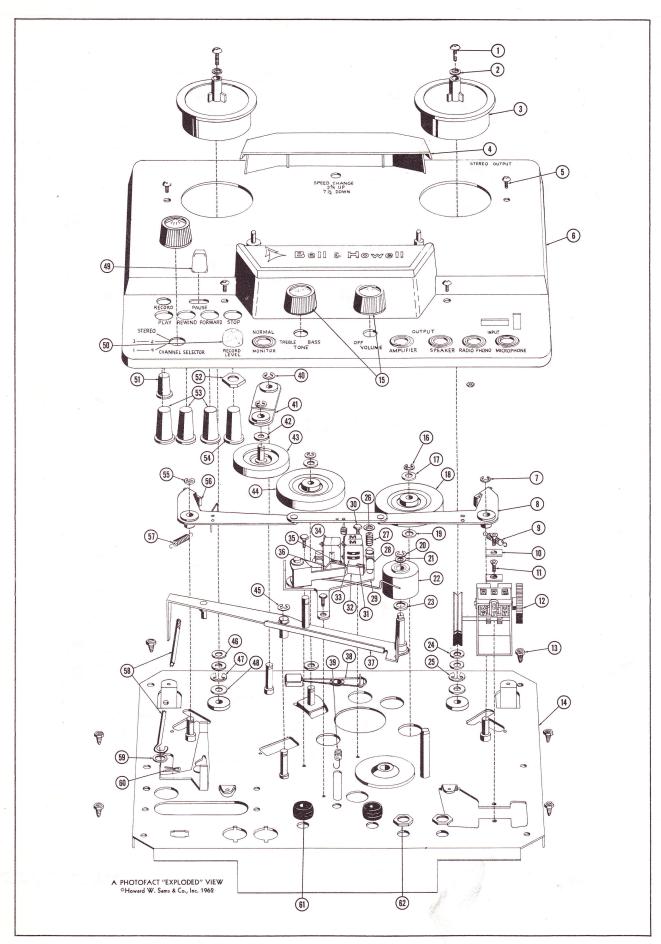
A EXPLODED VIEW OF PARTS ABOVE PLATE ASSEMBLY
